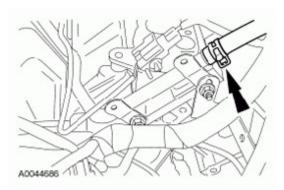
Installing Heater Outlet Tube Courtesy of FORD MOTOR CO.
